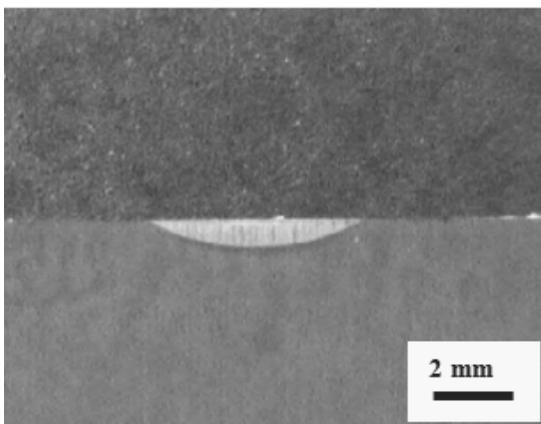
Shape and thickness of cross-section of the laser remelted samples, alloyed with laser power of 1.2 kW, WC
